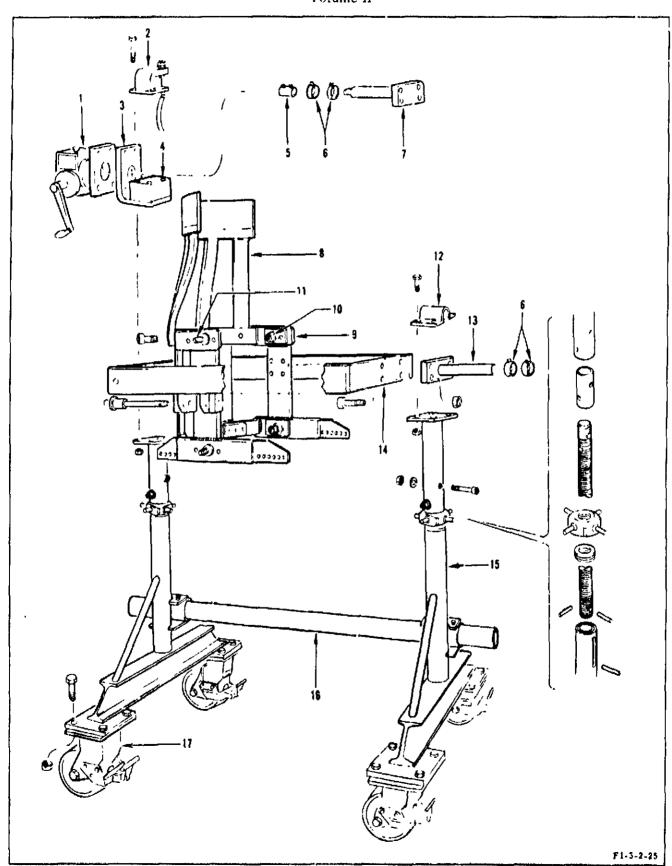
Assembly Stand T-5029363 (Sheet 1 of 2)
